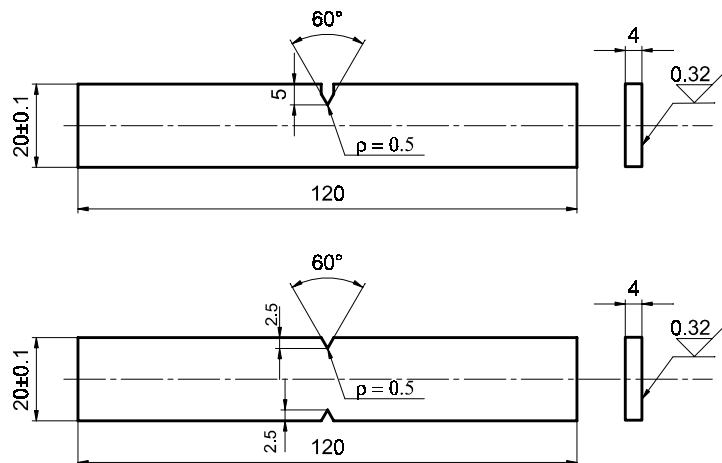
Shapes and dimensions of specimens for tests of fatigue crack growth.
